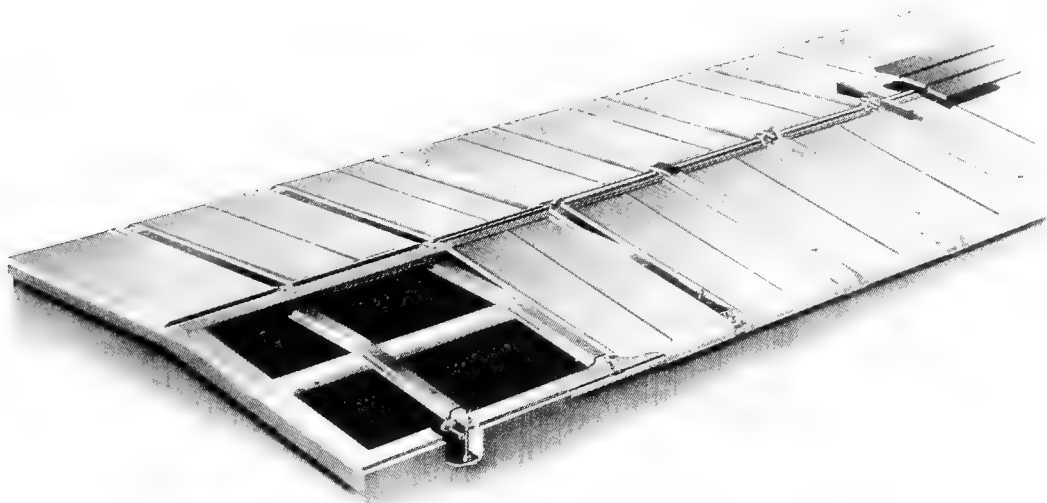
Hutchins All Steel Steel Carline Roof Applied to Wooden Car. Hutchins Car Roofing Company.
